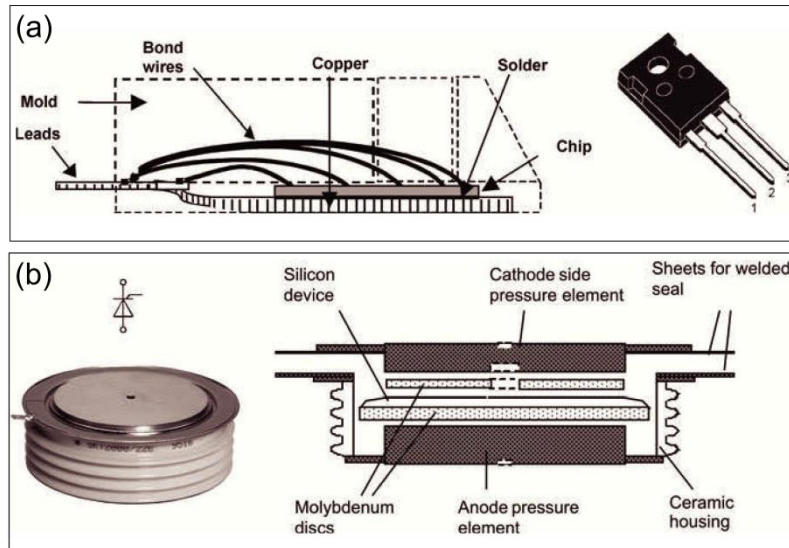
Package assembly for a TO package (a) and a capsule (b) [1].
